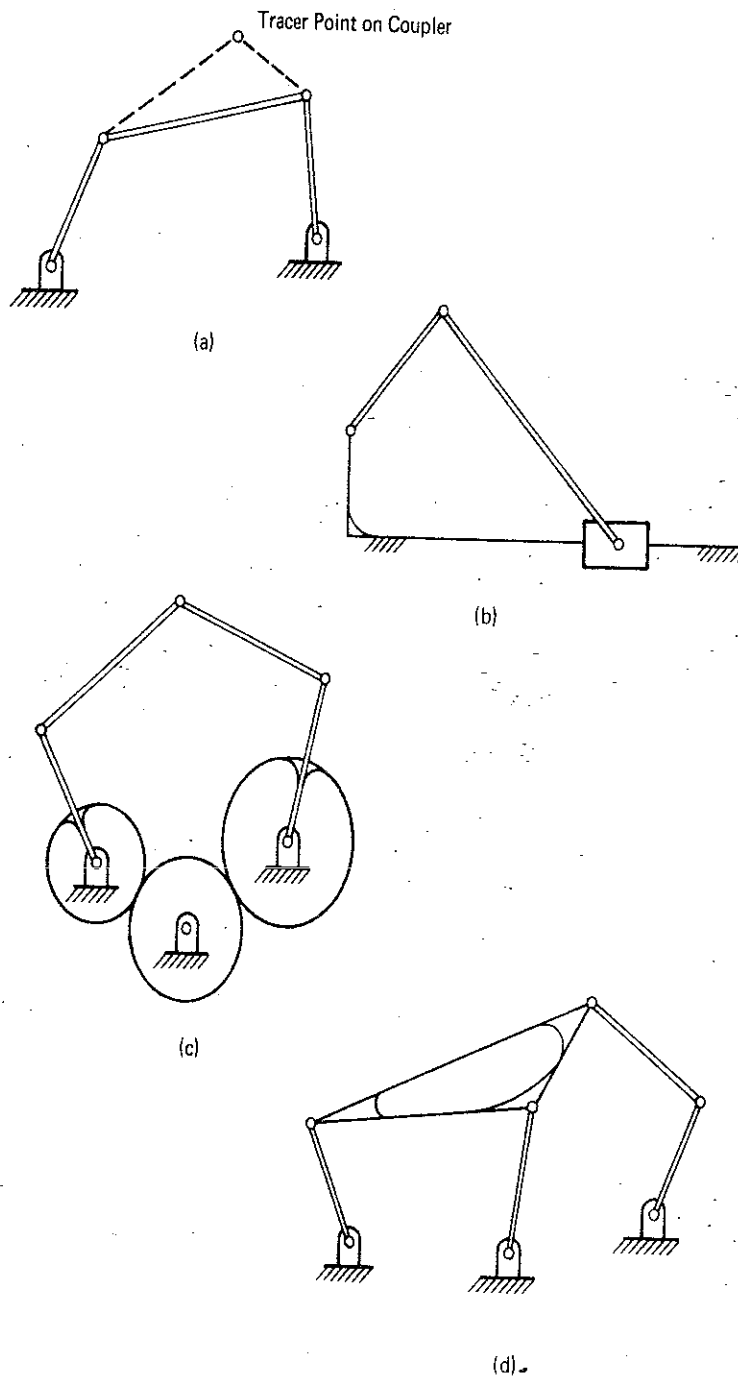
Some mechanisms of preconceived type; (a) four-bar linkage; (b) slider-crank; (c) geared five-bar linkage; (d) Stephenson III six-link mechanism.
